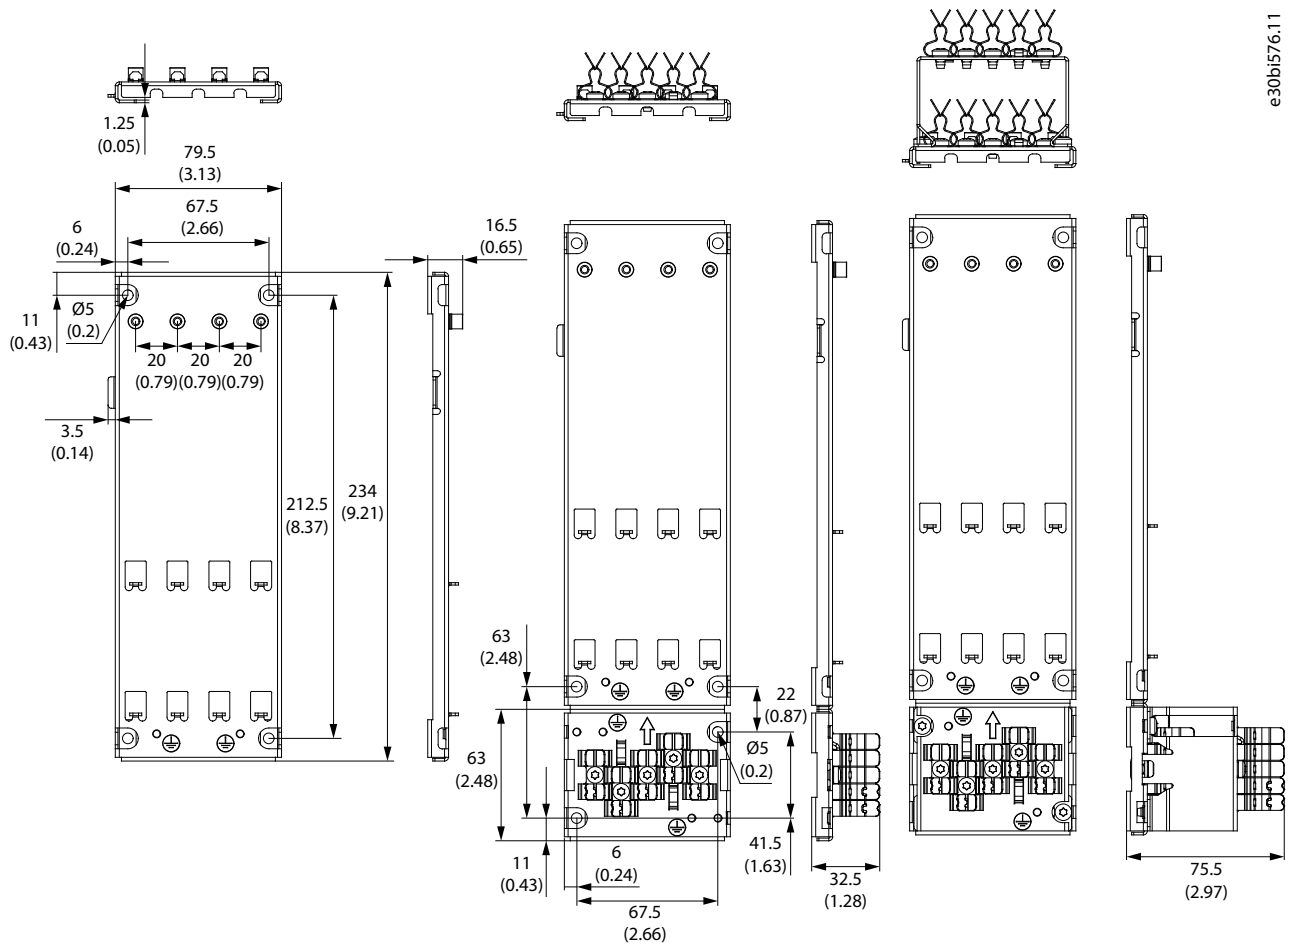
Dimensions of the Modular Control Unit Mounting Plate in mm (in), 4 Places
